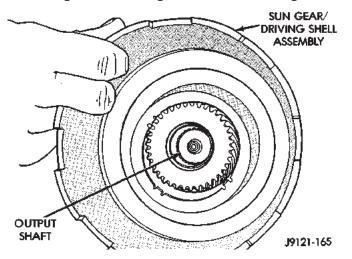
Installing Assembled Sun Gear And Driving Shell On Output Shaft
